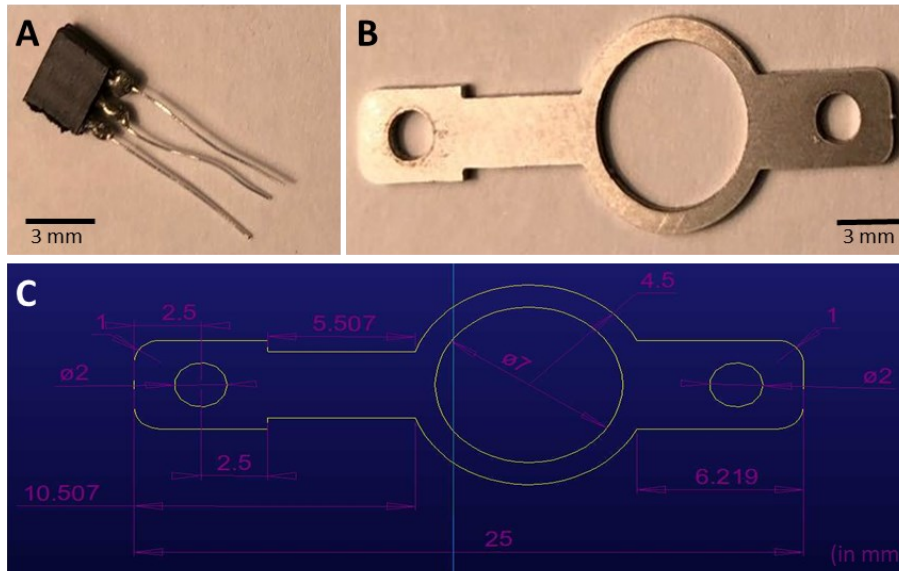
Custom ECoG electrodes and laser-cut head-plate design. (A) An ECoG electrode consisted of a slim 3-pin female connector (pins trimmed to 1 mm in length) soldered to three insulated silver wires. (B) The head-plate was designed to fit the imaging setup already established in the Cardiff lab. The circular frame of the head-plate was flanked with two vertical arms that were secured to a U-shaped frame with bolts for head-fixed imaging. The stainless-steel head-plate had a slim, 1 mm thick, frame that allowed room for the ECoG electrode to fit alongside it, while offering enough support to keep the animal's head still during calcium imaging experiments. (C) Head-plate AutoCAD® design (measurements shown in mm; Ø: diameter).
